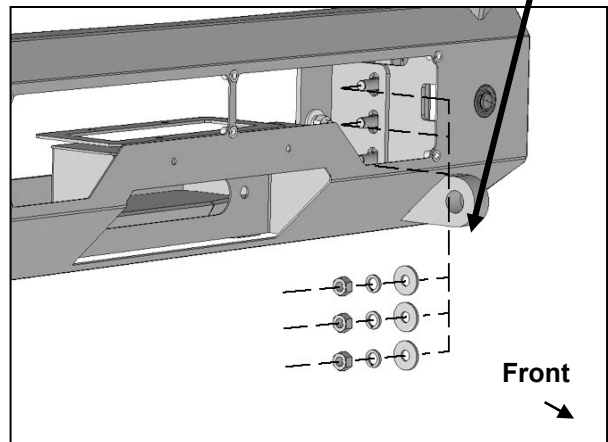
Reinstall factory bumper over Bracket Assembly. Driver/left side pictured
